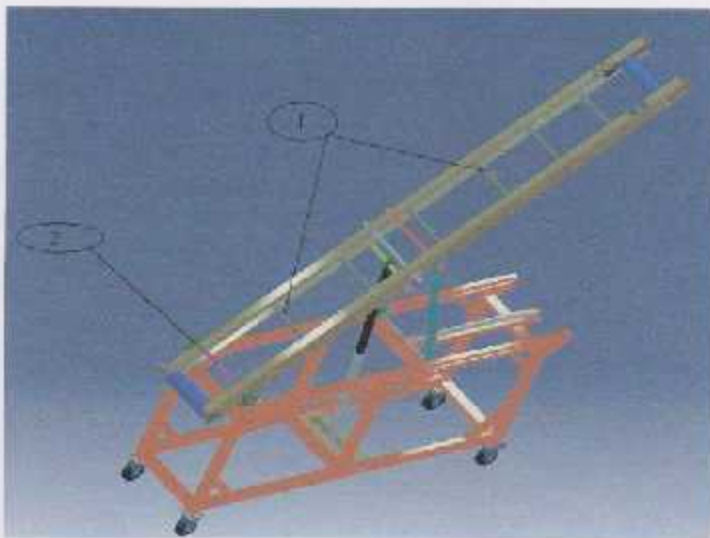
the conveyor with connecting shaft(1), and base shaft(2)
